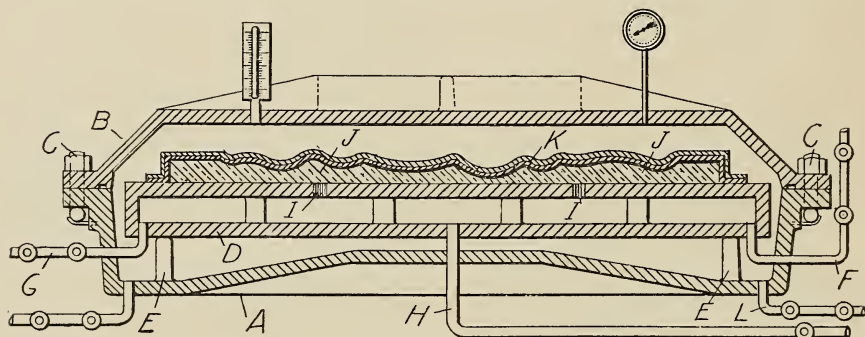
APPARATUS FOR MAKING RUBBER MOLDS.
